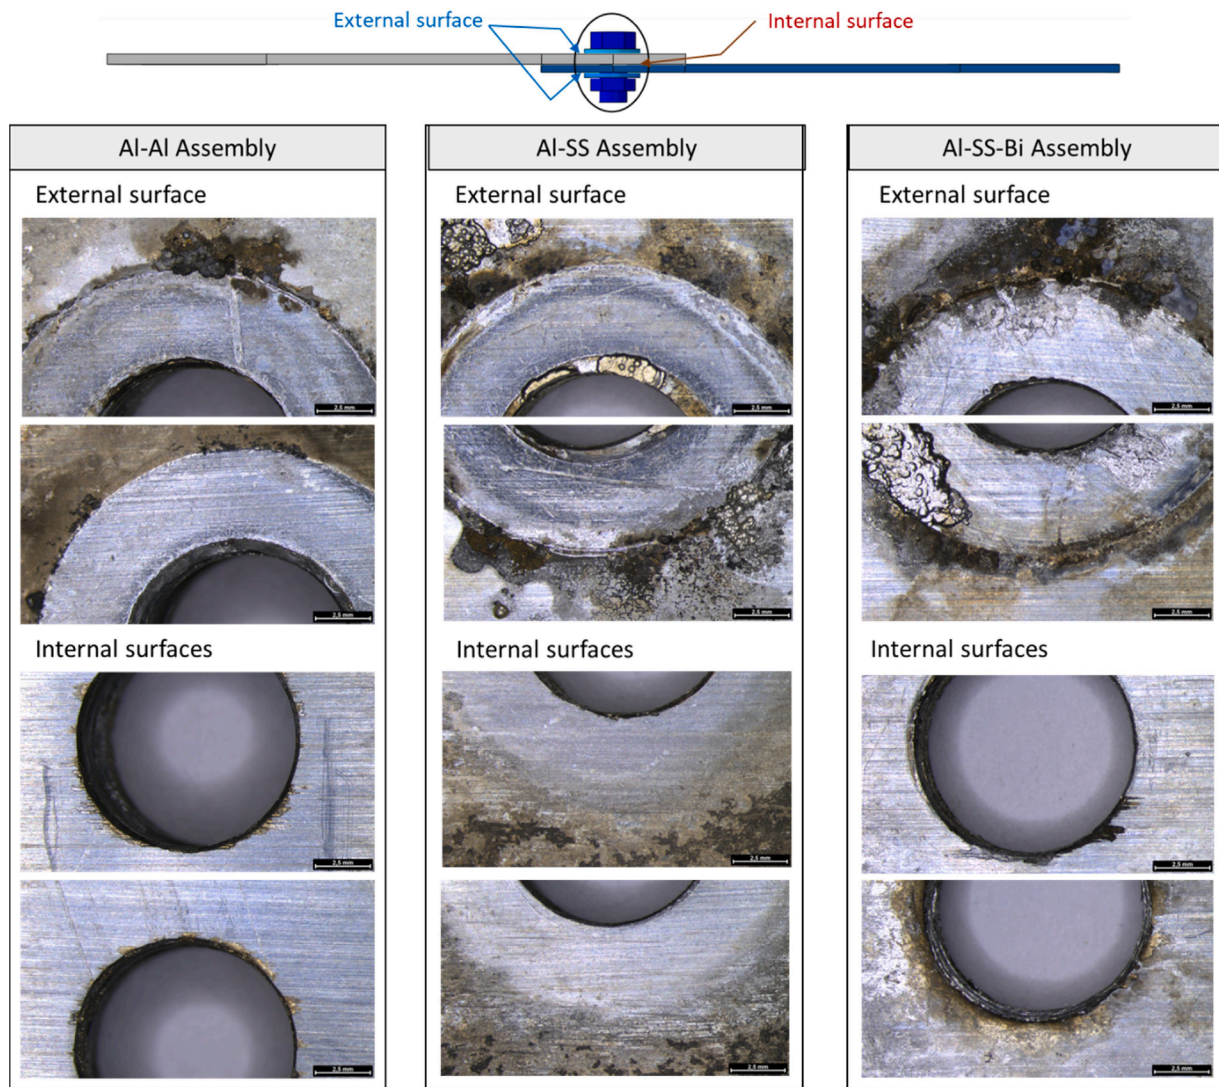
Optical images showing corrosion attack in the areas around the bolt on the external and internal surfaces of the assemblies after 16 weeks of CSSC testing.
